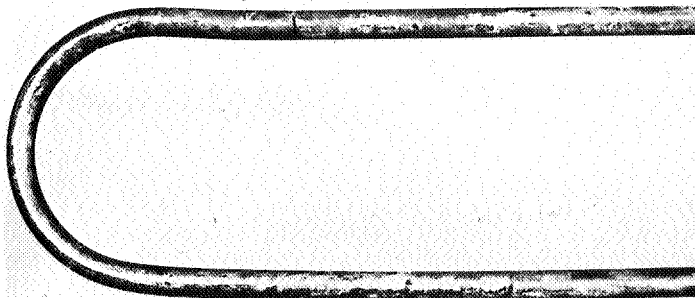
Failure in straight section of Type 304L tubing. X/3.
